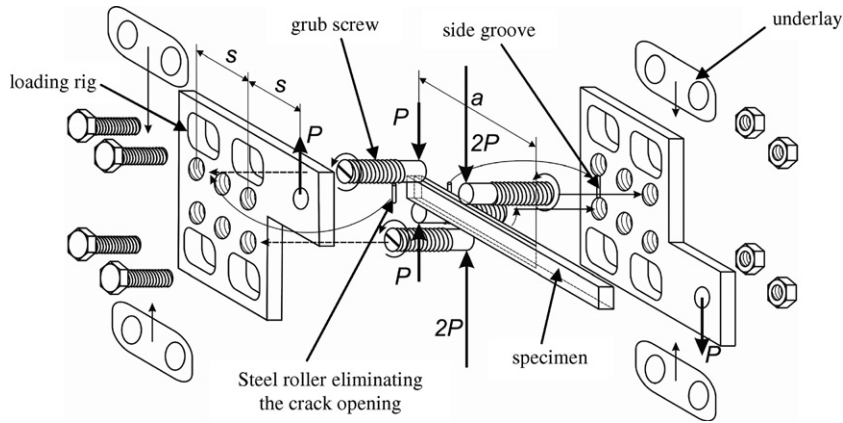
Exploded view of the Modified Split-Cantilever Beam.
